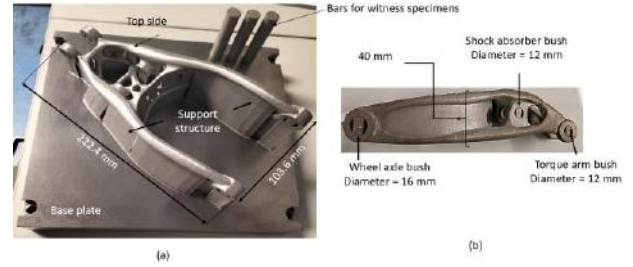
Images (a) of the SLM Ti6Al4V(ELI) scaled-down nose wheel fork with the cylindrical bars for machining standards tensile test specimens, (b) dimensions on the side view of the nose wheel fork.
